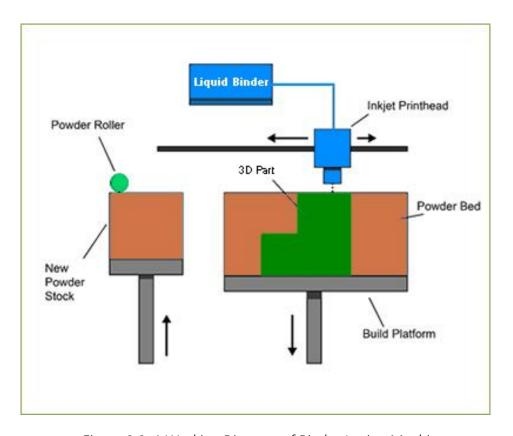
1 Working Diagram of Binder Jetting Machine
